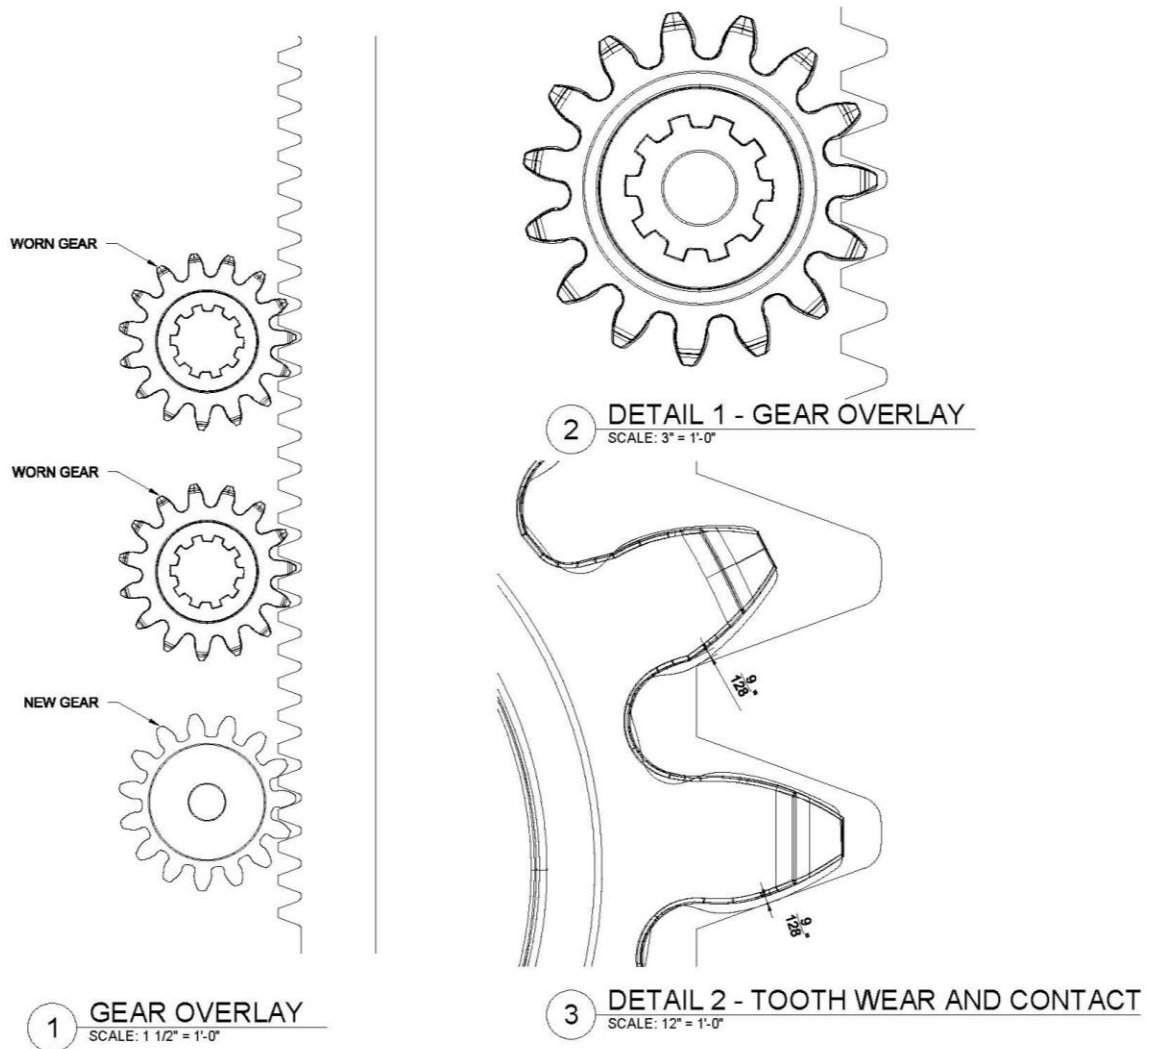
Orientation of Pinion Gears (1.1), Overlay of a worn pinion gear (side profile) over the new pinion gear (1.2), Detailed view of overlay showing extent of tooth wear (1.3)
